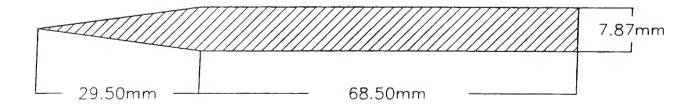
Dimensions and Geometries of the U-3/4% Ti Nose-Shape Projectiles.
